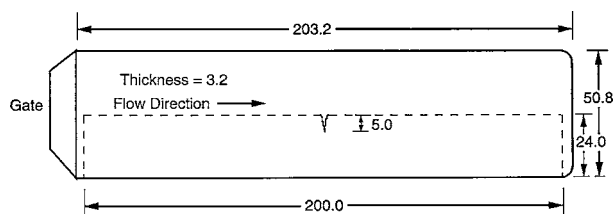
Schematic view of injection molded plaque and Single Edge Notch (SEN) sample used for fatigue crack growth measurements.
